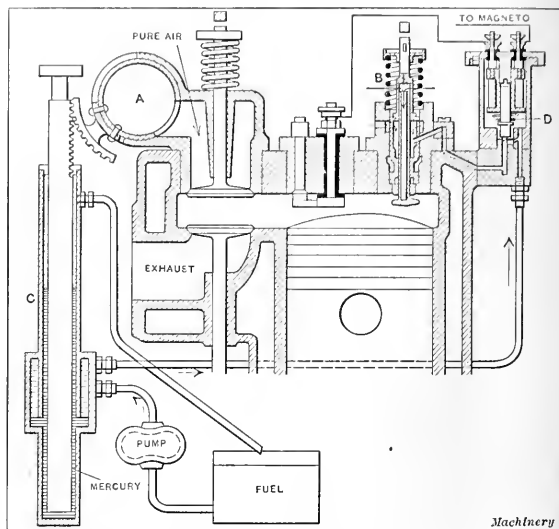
Kerosene Carbureting Device which requires no Heat. It is equipped with electrically operated Valve for controlling Supply of Fuel
